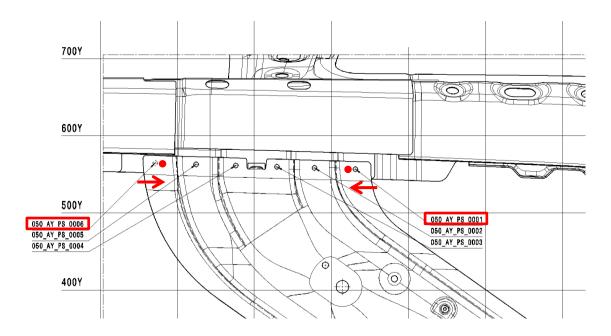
Reposition of a spot weld regarding flange dimension improvement. (*Volkswagen Body Engineering*)
